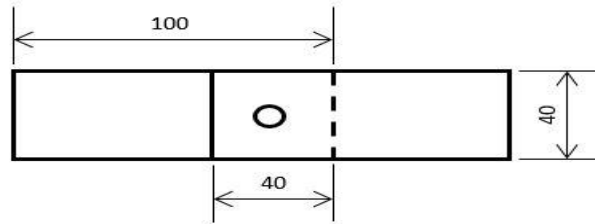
Welding sample installed as lapping joints for the shear-tensile test
